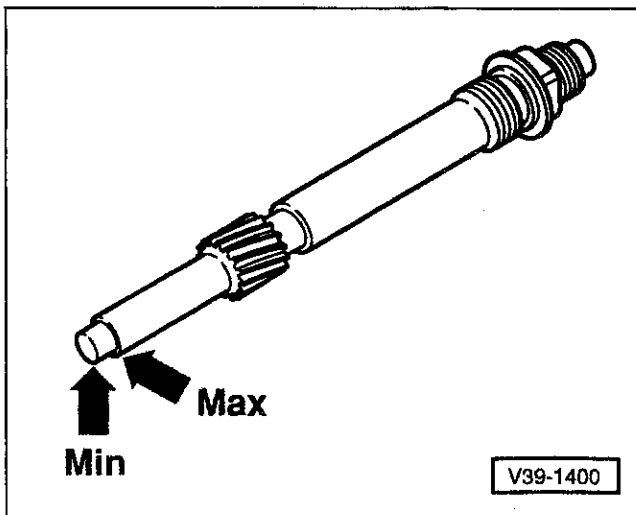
Speedometer drive gear used to check final drive oil level. Level should be between Min and Max marks.
